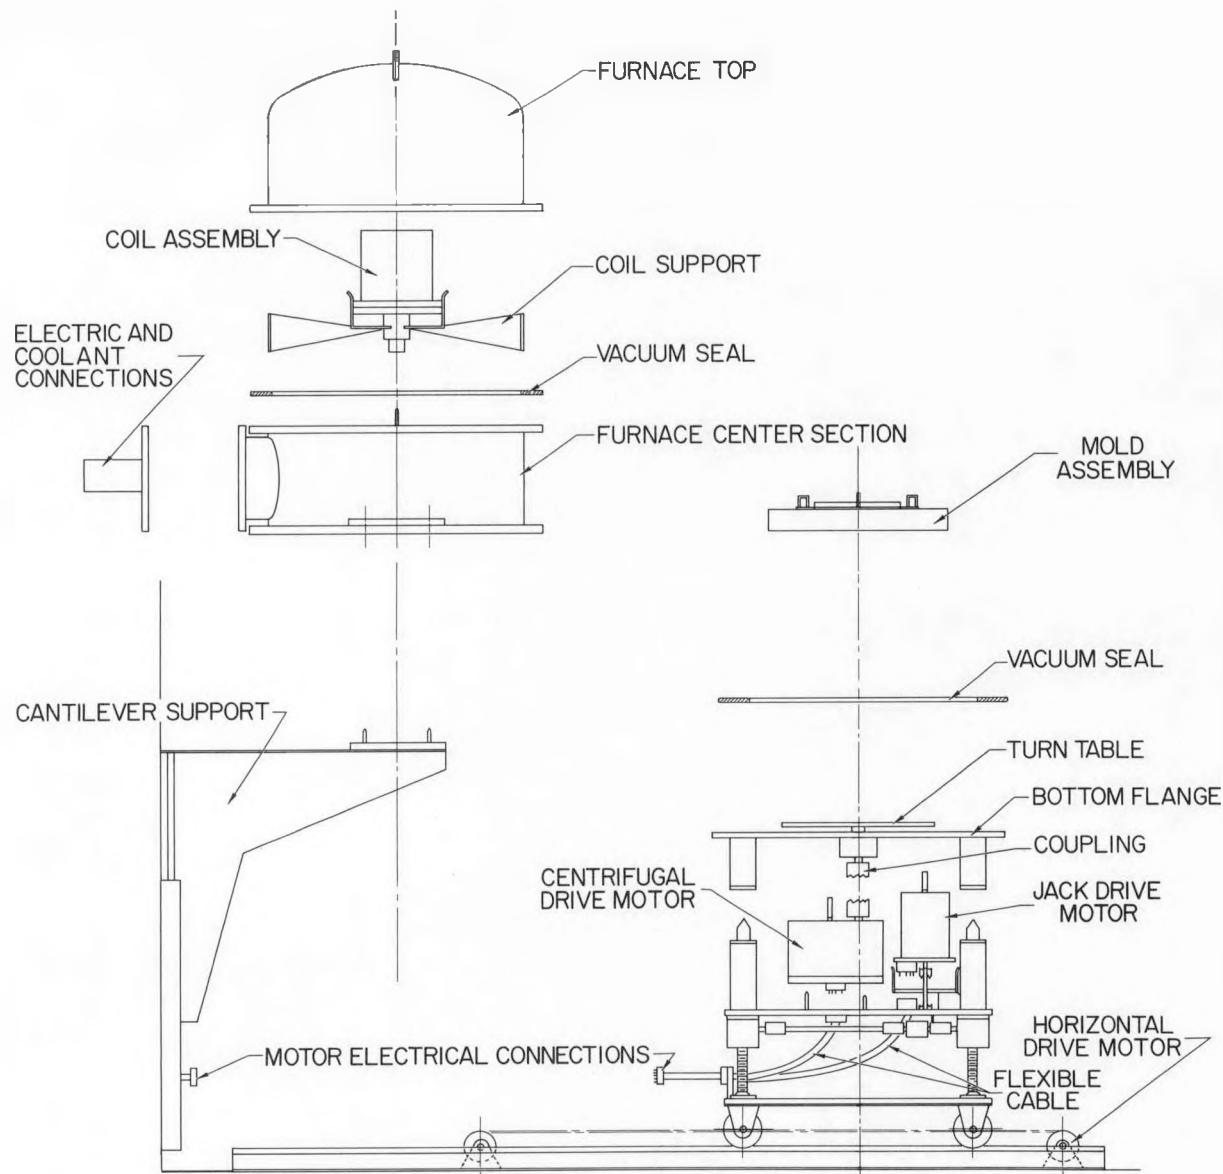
Conceptual Design of PRE In-Cell Vacuum Casting Furnace - Exploded View
